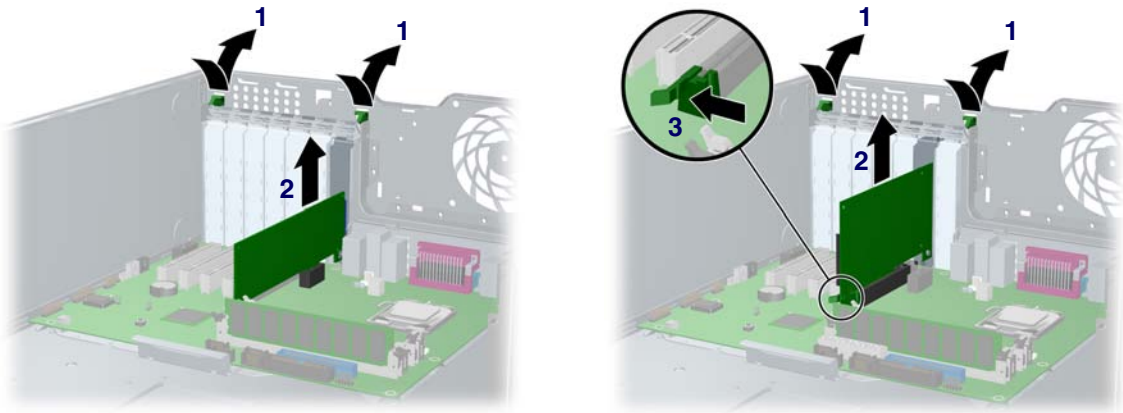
PCI card removal (left) and PCI Express card removal (right)
